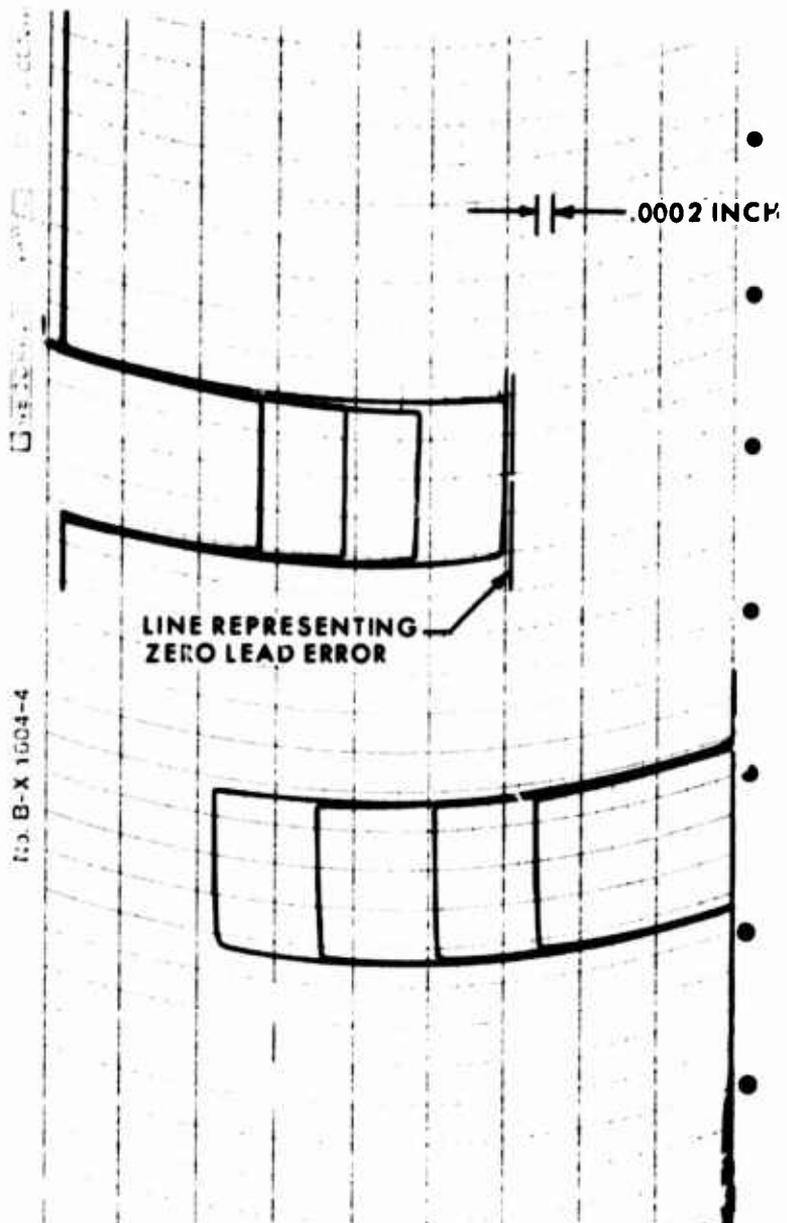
Lead Inspection Chart for First-Row Pinion Large Diameter Gear.
